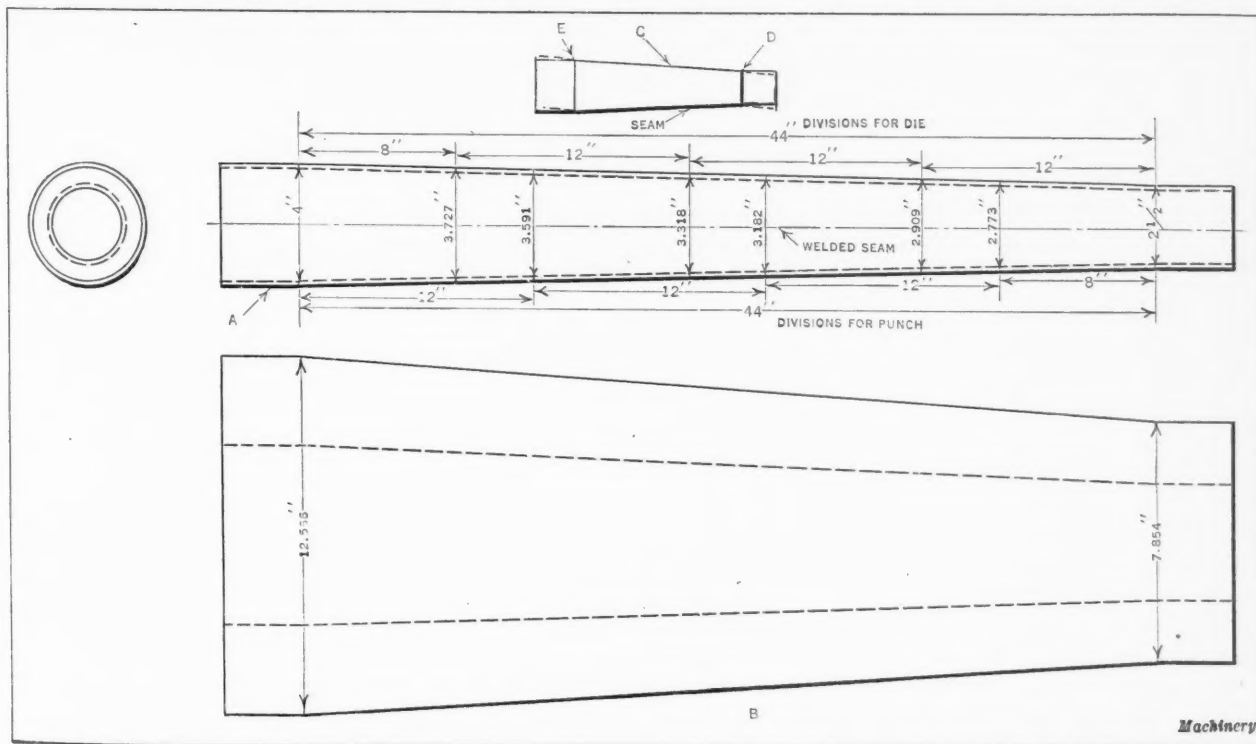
Automobile Torque Tube for which the Forming Dies Shown in Figs. 2 and 6 were Designed
